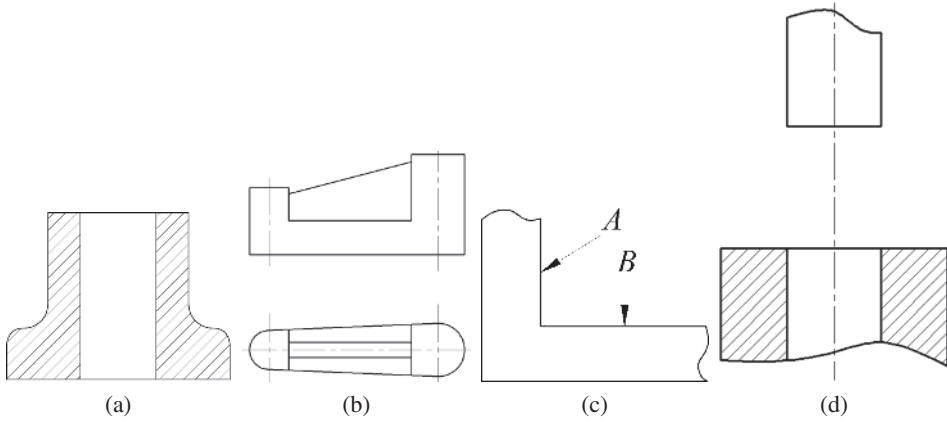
Illustration for Problem 4, four designs that may encounter manufacturing difficulties. (a) Casting. (b) Forging. (c) Heat treatment. (d) Assembly.
